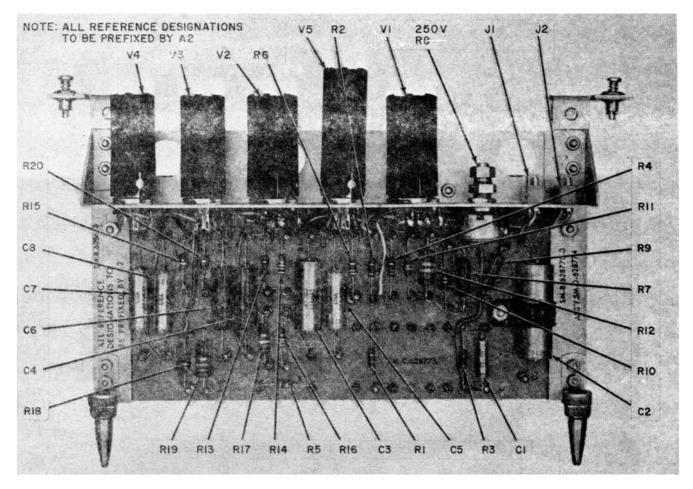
Terminal Board TB3-A2, parts location diagram.
